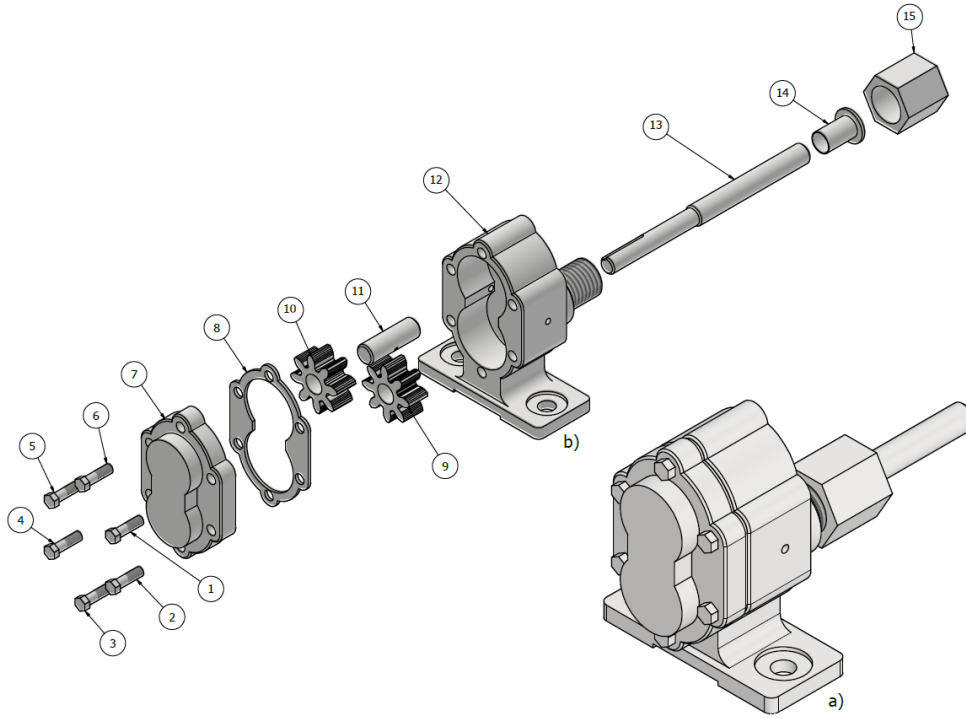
Gear Pump A: (a) assembled view; (b) exploded view.
